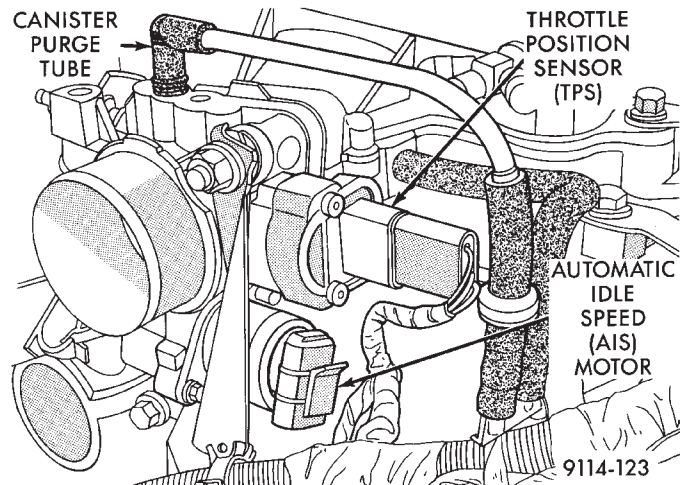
Electrical and Vacuum Connections to Throttle Body
